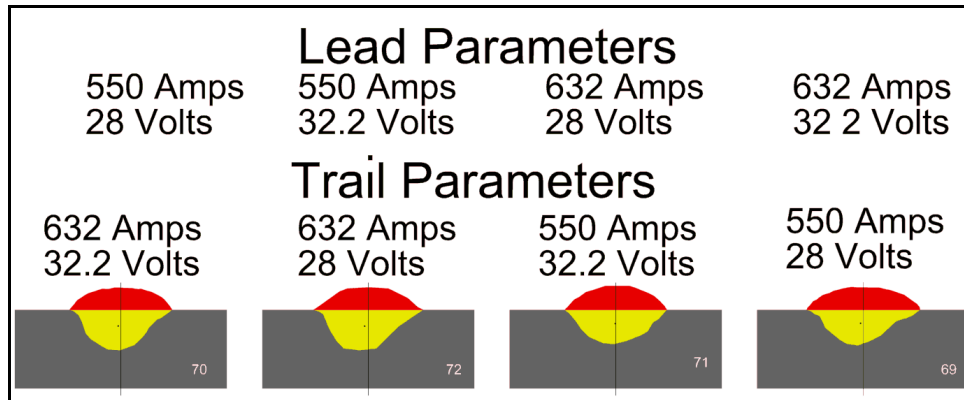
Cross-Section Profiles of DCEP/DCEN Weld Beads Produced Using Maximum Travel Speed
